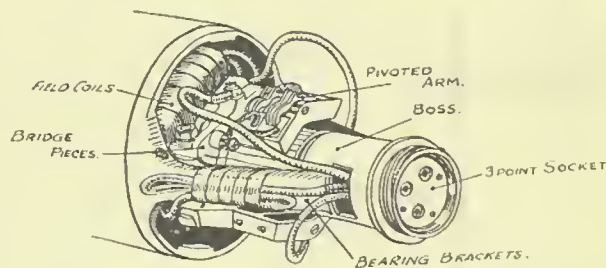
GENERATOR WITH REAR SPINNING REMOVED
